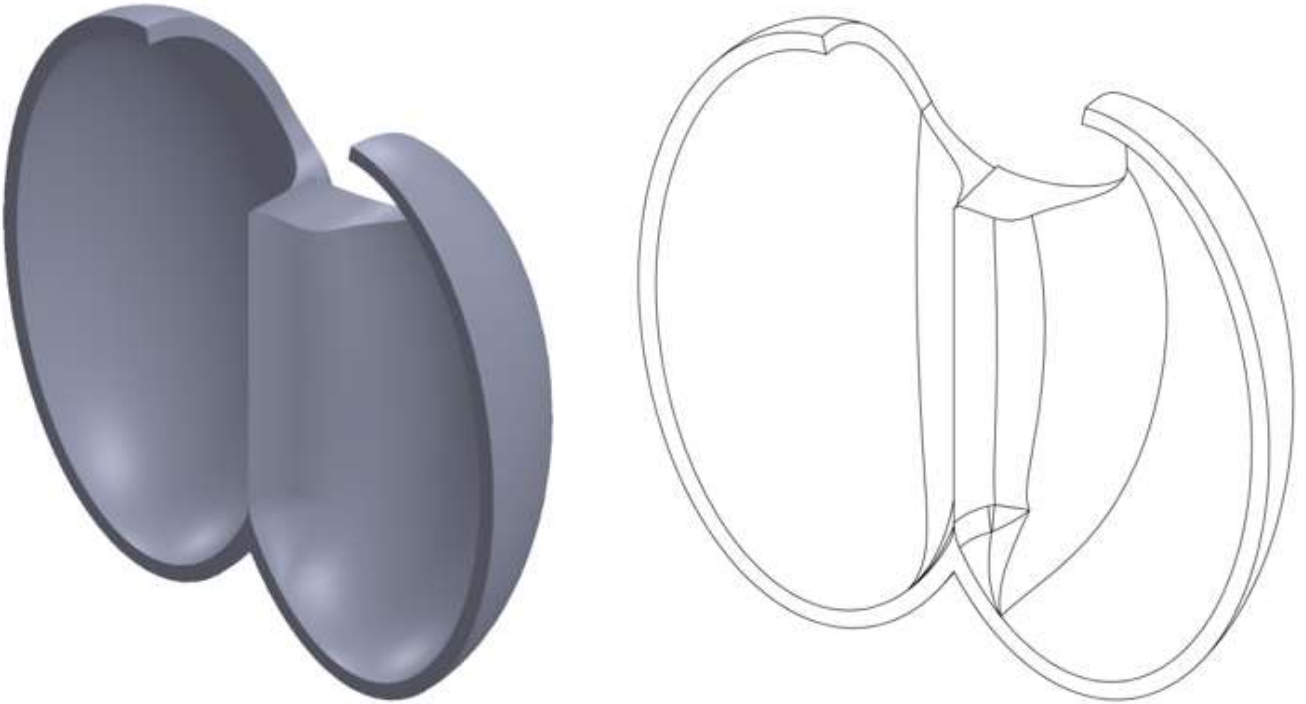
Pelton bucket isometric view rendered (left) and drawing (right).
